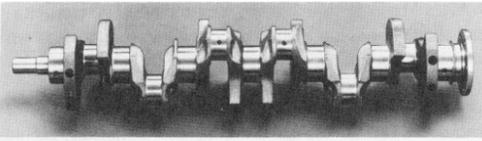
Six-cylinder automotive crankshaft (Courtesy of Central Foundry, Division of General Motors Corporation)
